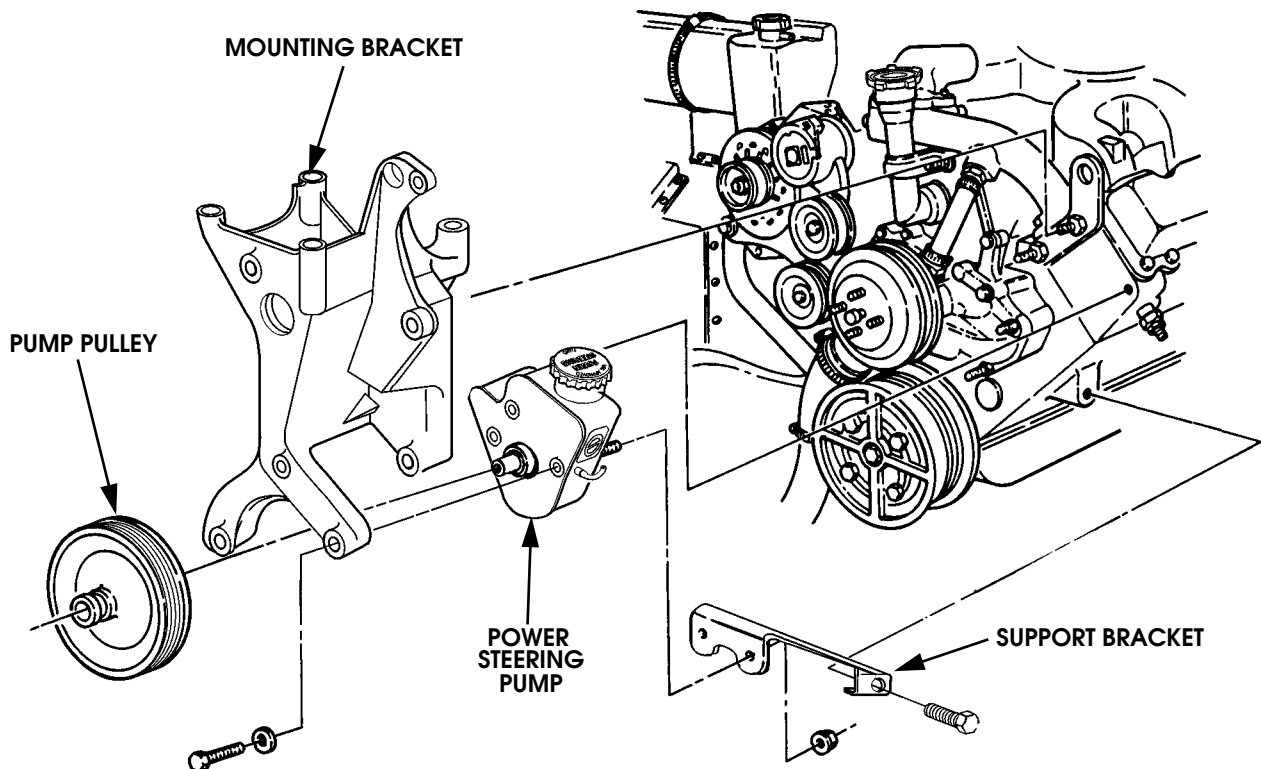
Power Steering Pump and Bracket Removal (Turbo Diesel)
